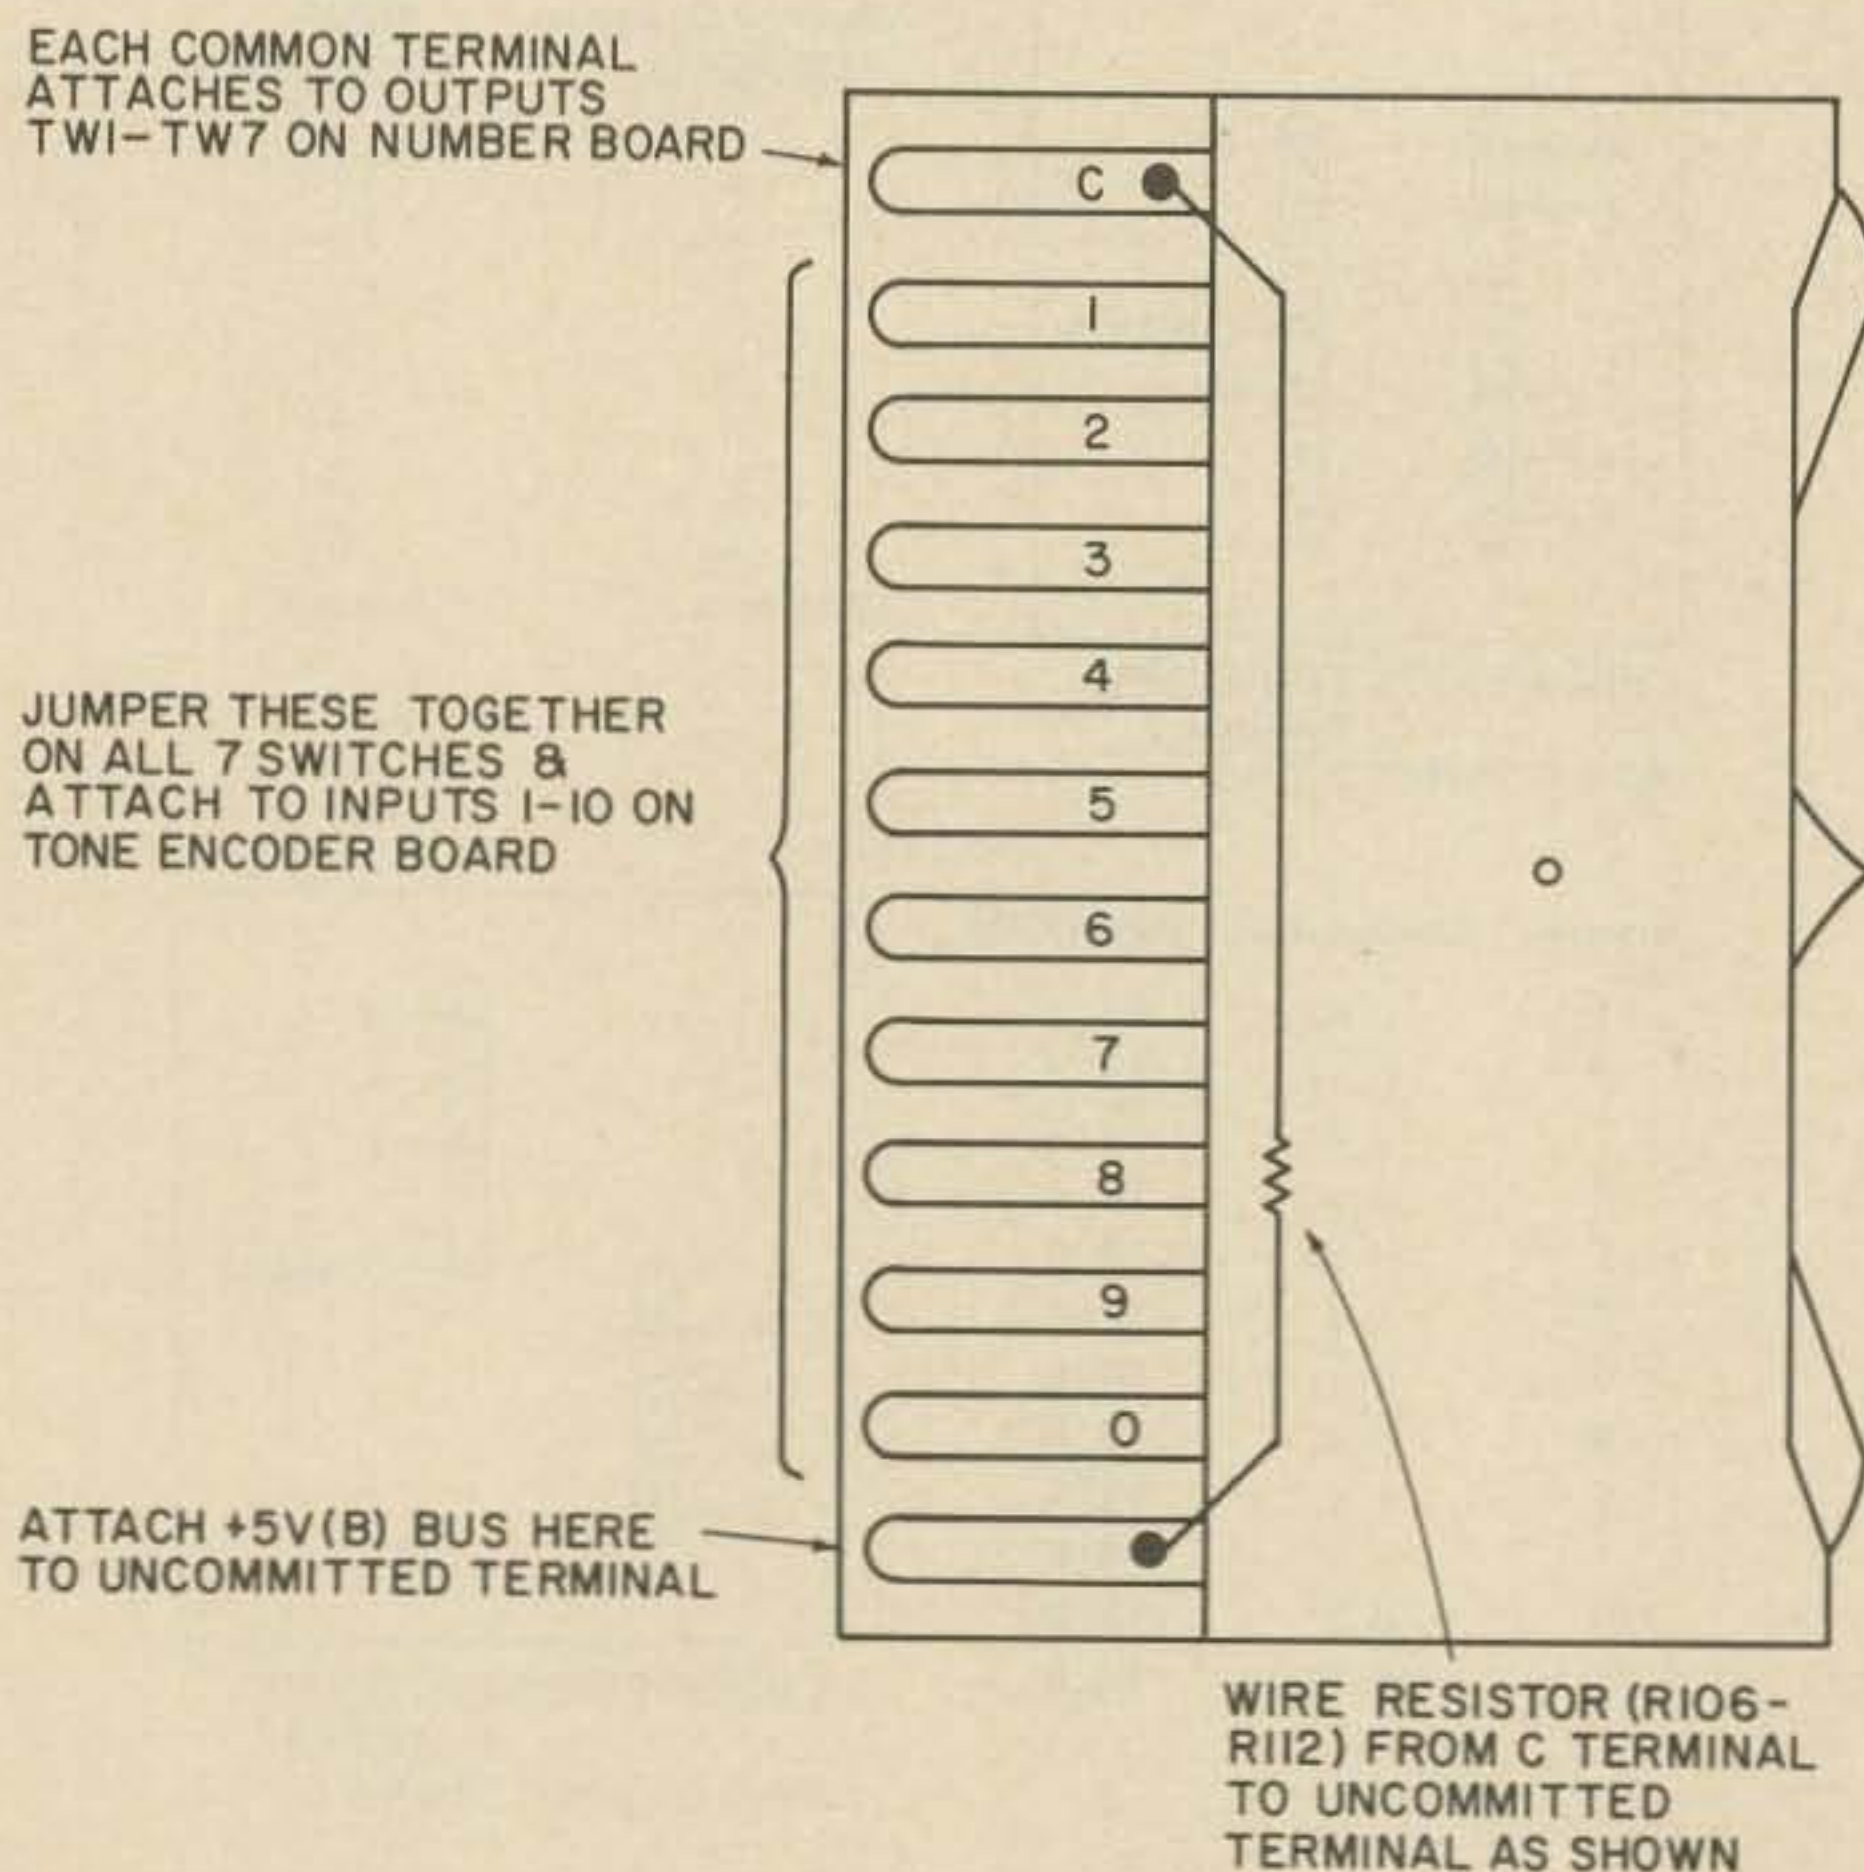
Thumbwheel switch detail (side view showing method of wiring).
